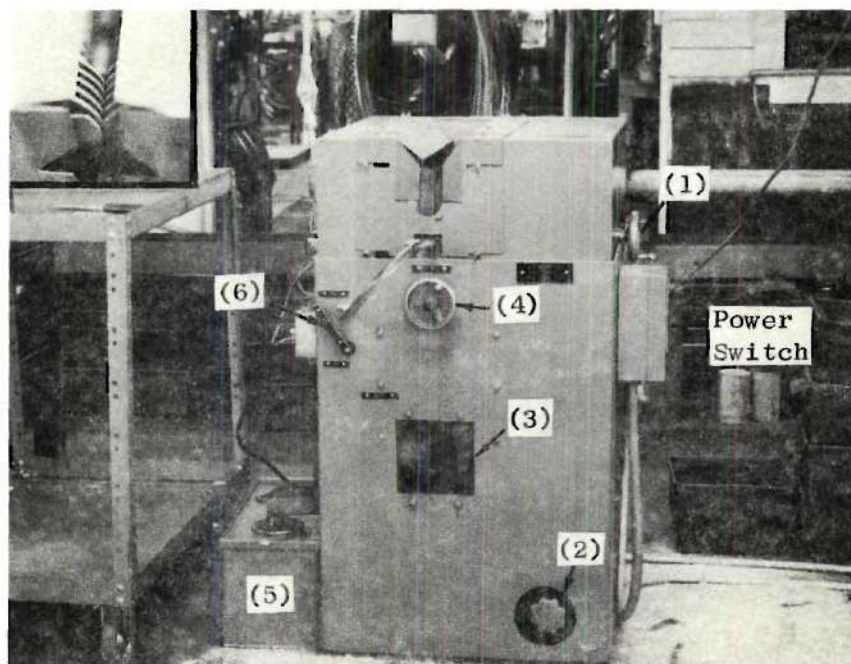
Nicholas Edge Grinding Machine. Insert is Detail View of Abrasive Wheel Configuration, Arrows Indicate Wheel Rotation. Numbers Refer to Discussion in Text.
